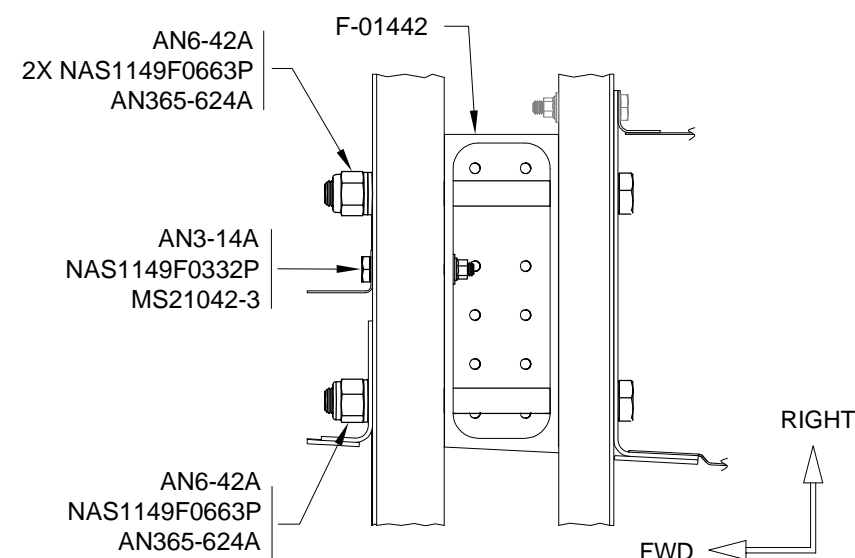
LOWER DRAG FITTING INSTALLATION
